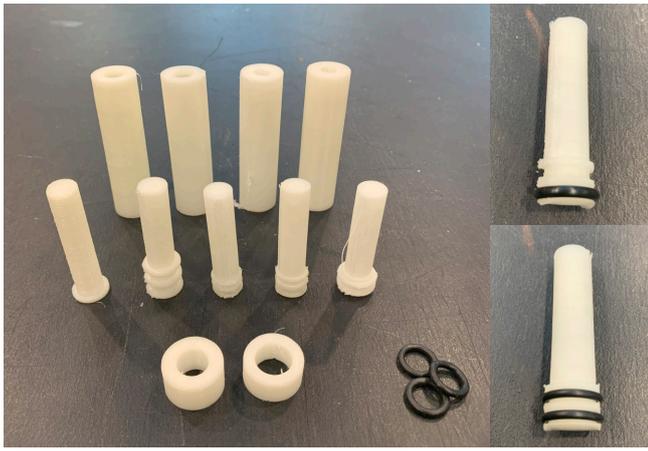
Overview of developed pneumatic cylinder prototypes many parts to function.
